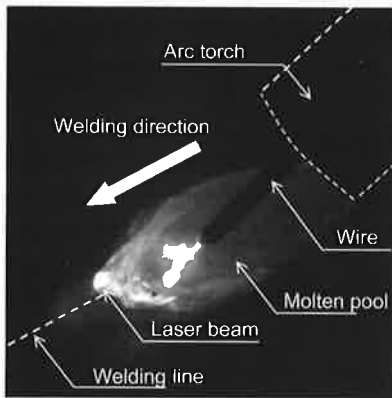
Typical frame of weld pool surface during hybrid welding in laser-leading by high speed camera
